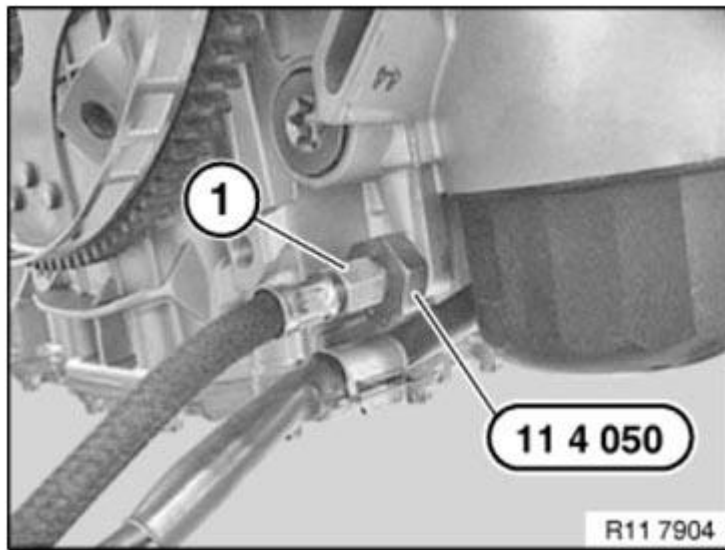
Identifying Union Nut And Special Tool 11 4 050
